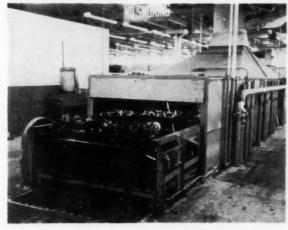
Automotive parts come out of a machine that applies a waxtype slushing compound
